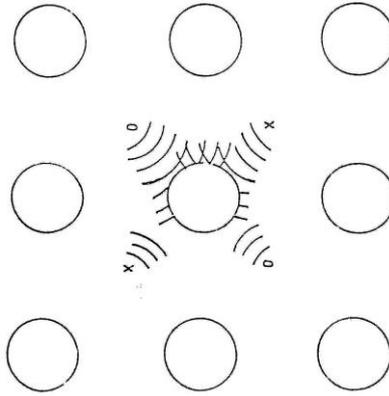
TECHNIQUES FOR EXAMINATION OF FILLET WELDS
